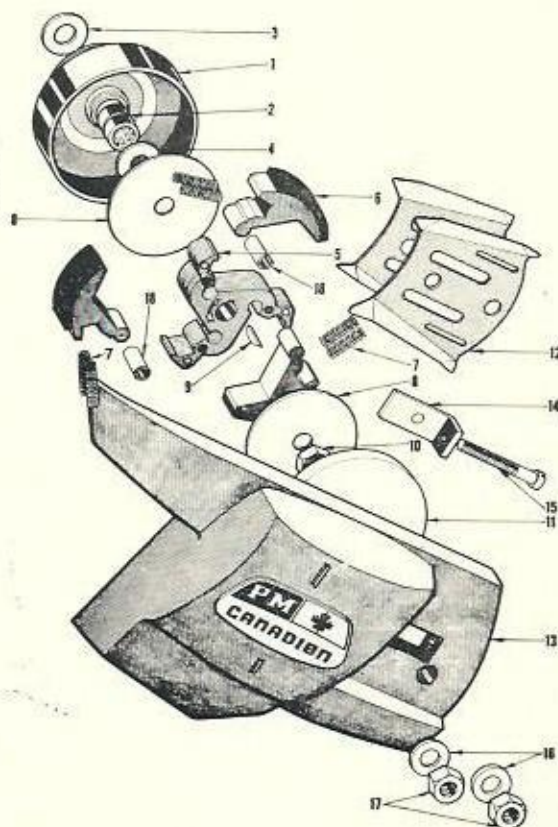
Exploded view of Model 275 chain saw engine. Other models are similar except for muffler design.
